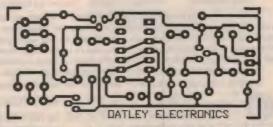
Here's the PCB pattern for the IR switch, if you want to make your own.
